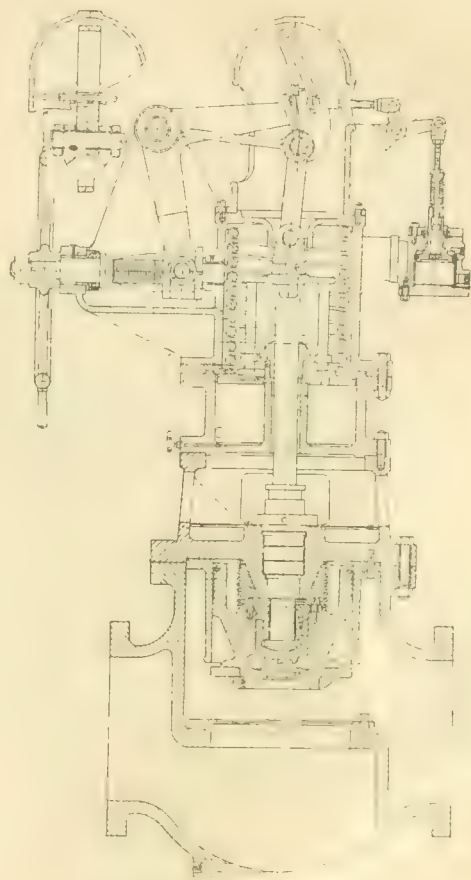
MODERN AUTOMATIC THROTTLE VALVE
